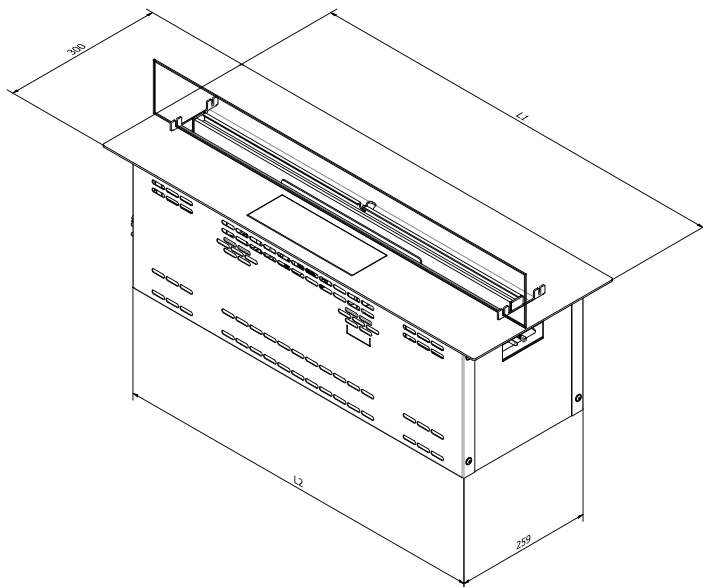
Overall dimensions shown on the single-pane version of the device
